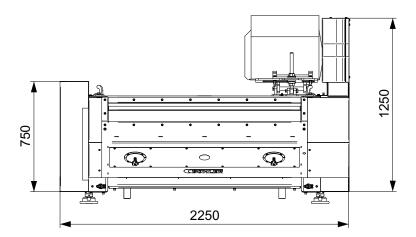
Dimensions of DFZL-1500 with 3 roller modules
